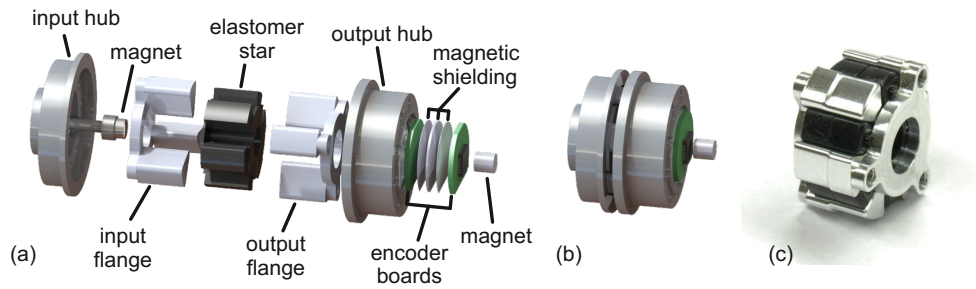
(a) Rendered explosion view of the elastomer coupling assembly. (b) Rendering of the assembled elastomer coupling. (c) Image of the elastomer star with input and output hubs.
